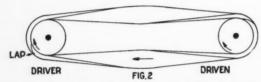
The belt should be placed on the pulleys with the lap as shown here so that the tendency will be for the small pulley to "smooth" the edge of the joint. Fig. 2.—By giving one end of the belt a half-turn, the tendency will be for both pulleys to smooth the joint.
